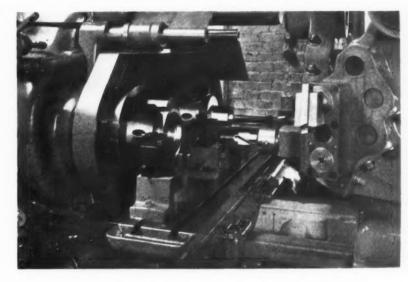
Machining the Gear Illustrated in Fig. 2 on a Two-spindle Automatic Chucking Machine
